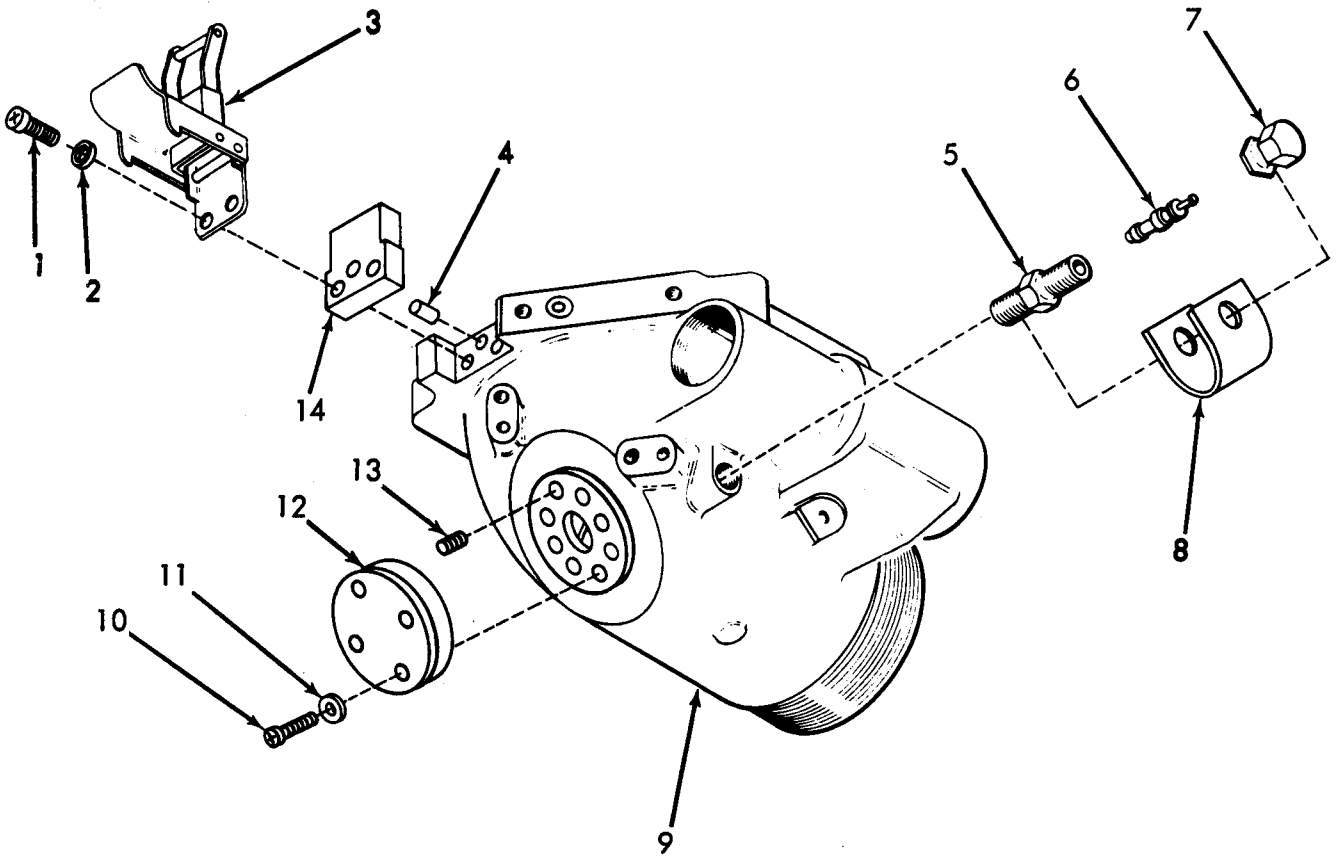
Body assembly (infrared) 11743800 (partial view-bottom)
